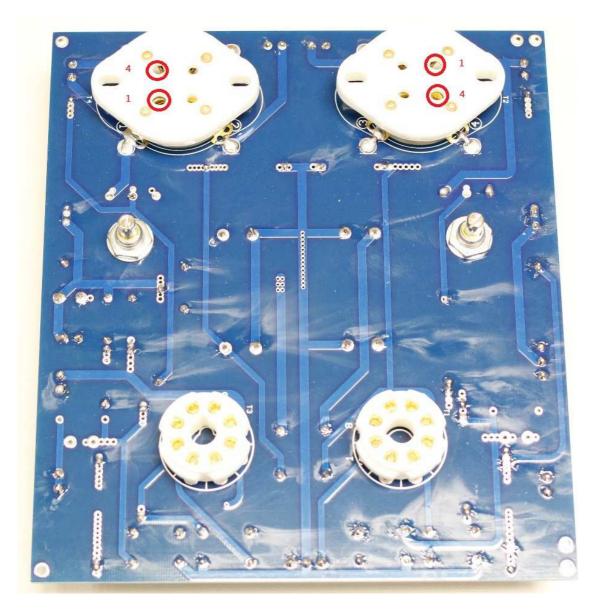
Direction of 4-Pin tube sockets for 300B and 8-Pin octal tubes sockets for 6SN7
